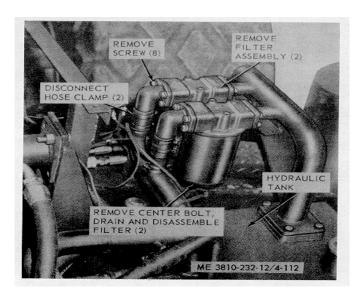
Hydraulic oil filter, removal and installation (model 2385) 4-117
